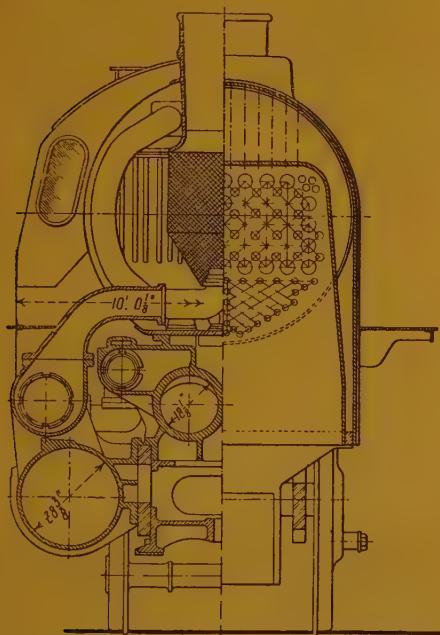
Half sections through cylinders and through firebox, 4-6-2 type.
